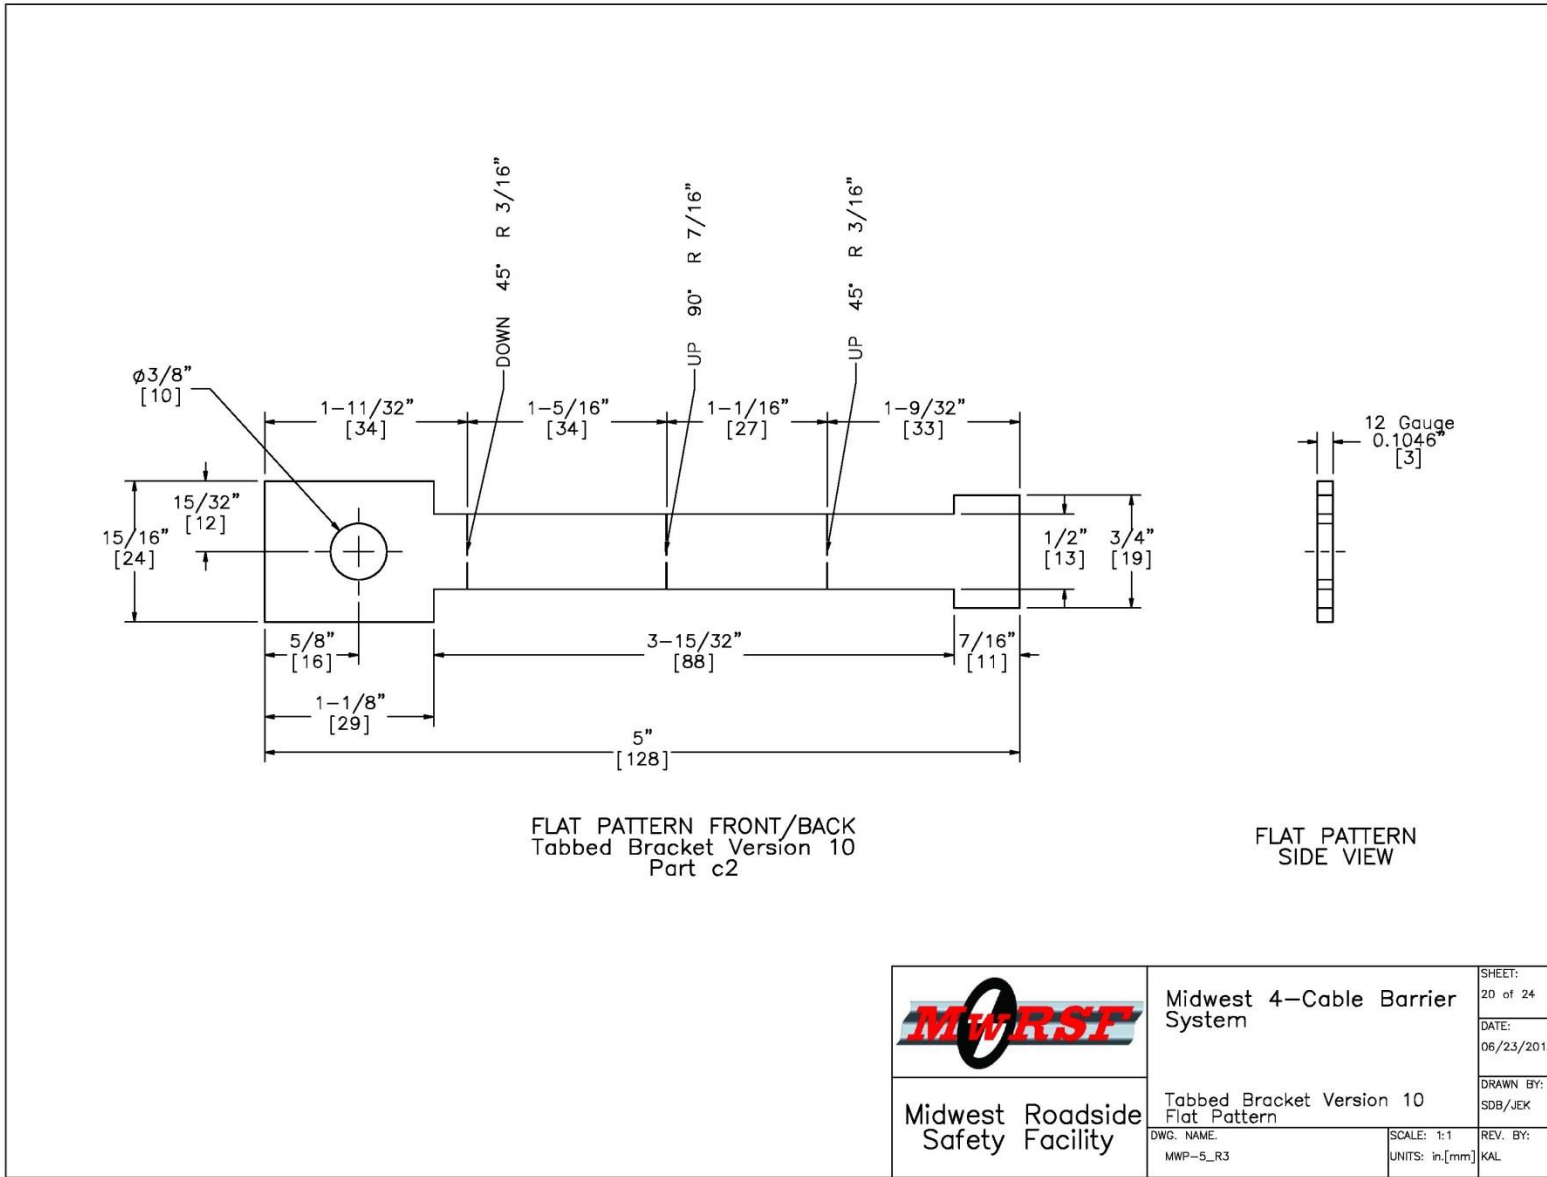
Tabbed Bracket Details, Flat Pattern, Test No. MWP-6
